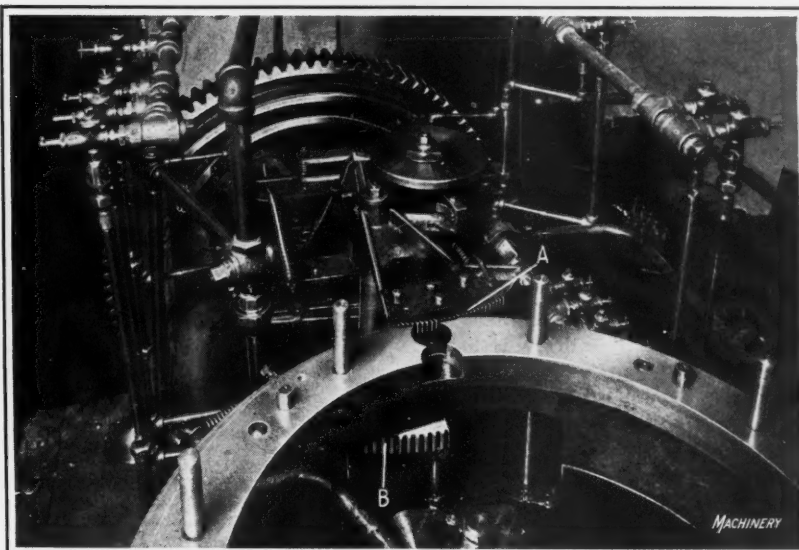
View taken with Tool-head removed so that the Tool Feeding and Clamping Mechanism can be seen
